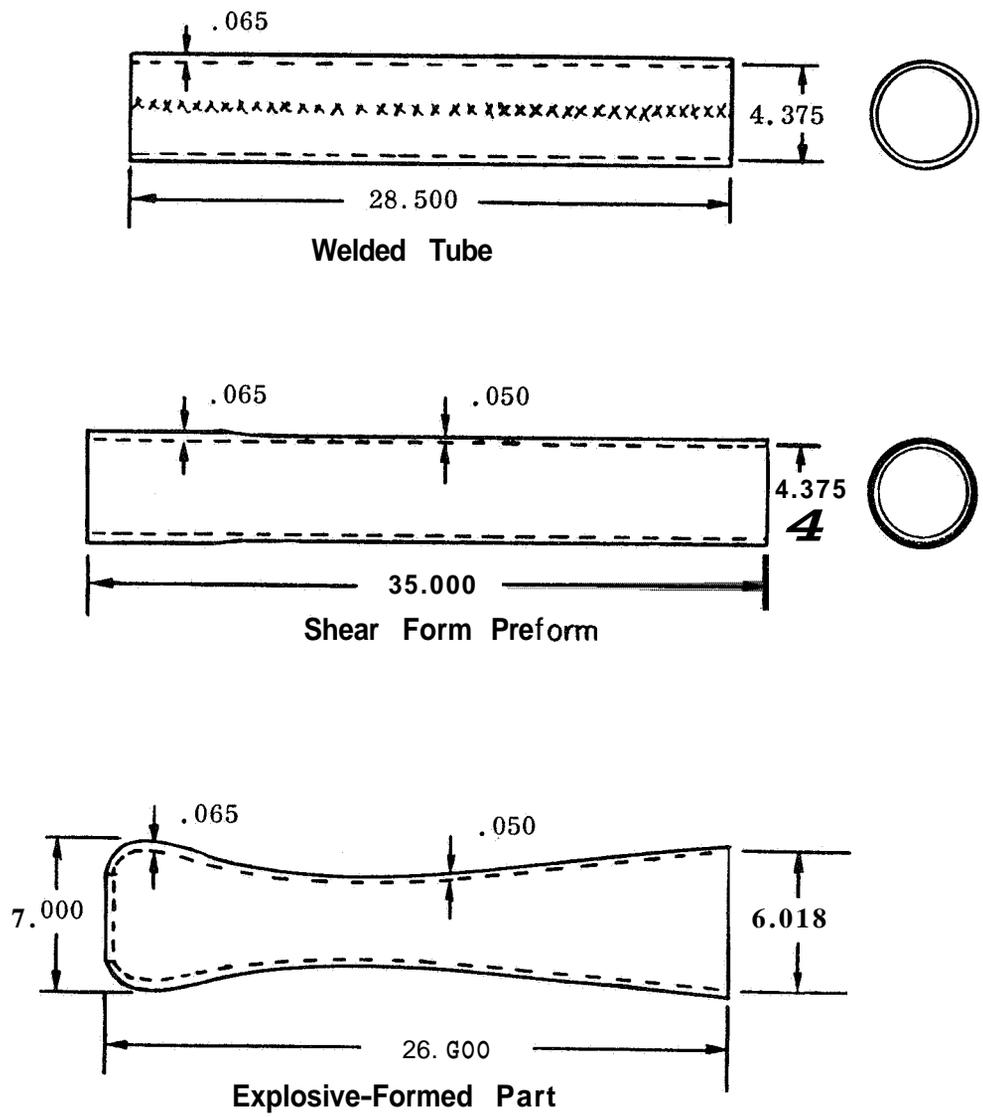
DIMENSIONAL REQUIREMENTS OF A PILOT CAN SHELL MADE OF 321 STAINLESS STEEL DURING THE THREE STAGES OF FABRICATION (Ref. 93)
